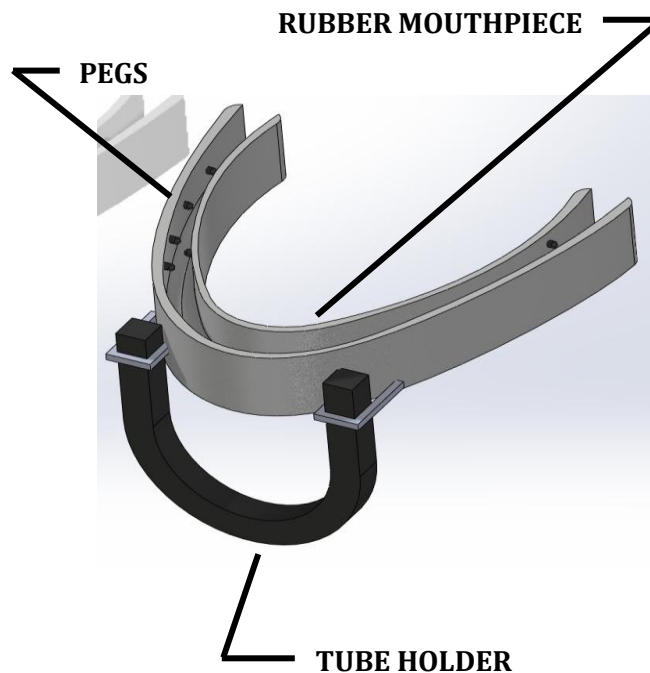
Solidworks model of the fitted mouthpiece design depicting the pressure points in the mouthpiece and “U-shape” tube holder.
